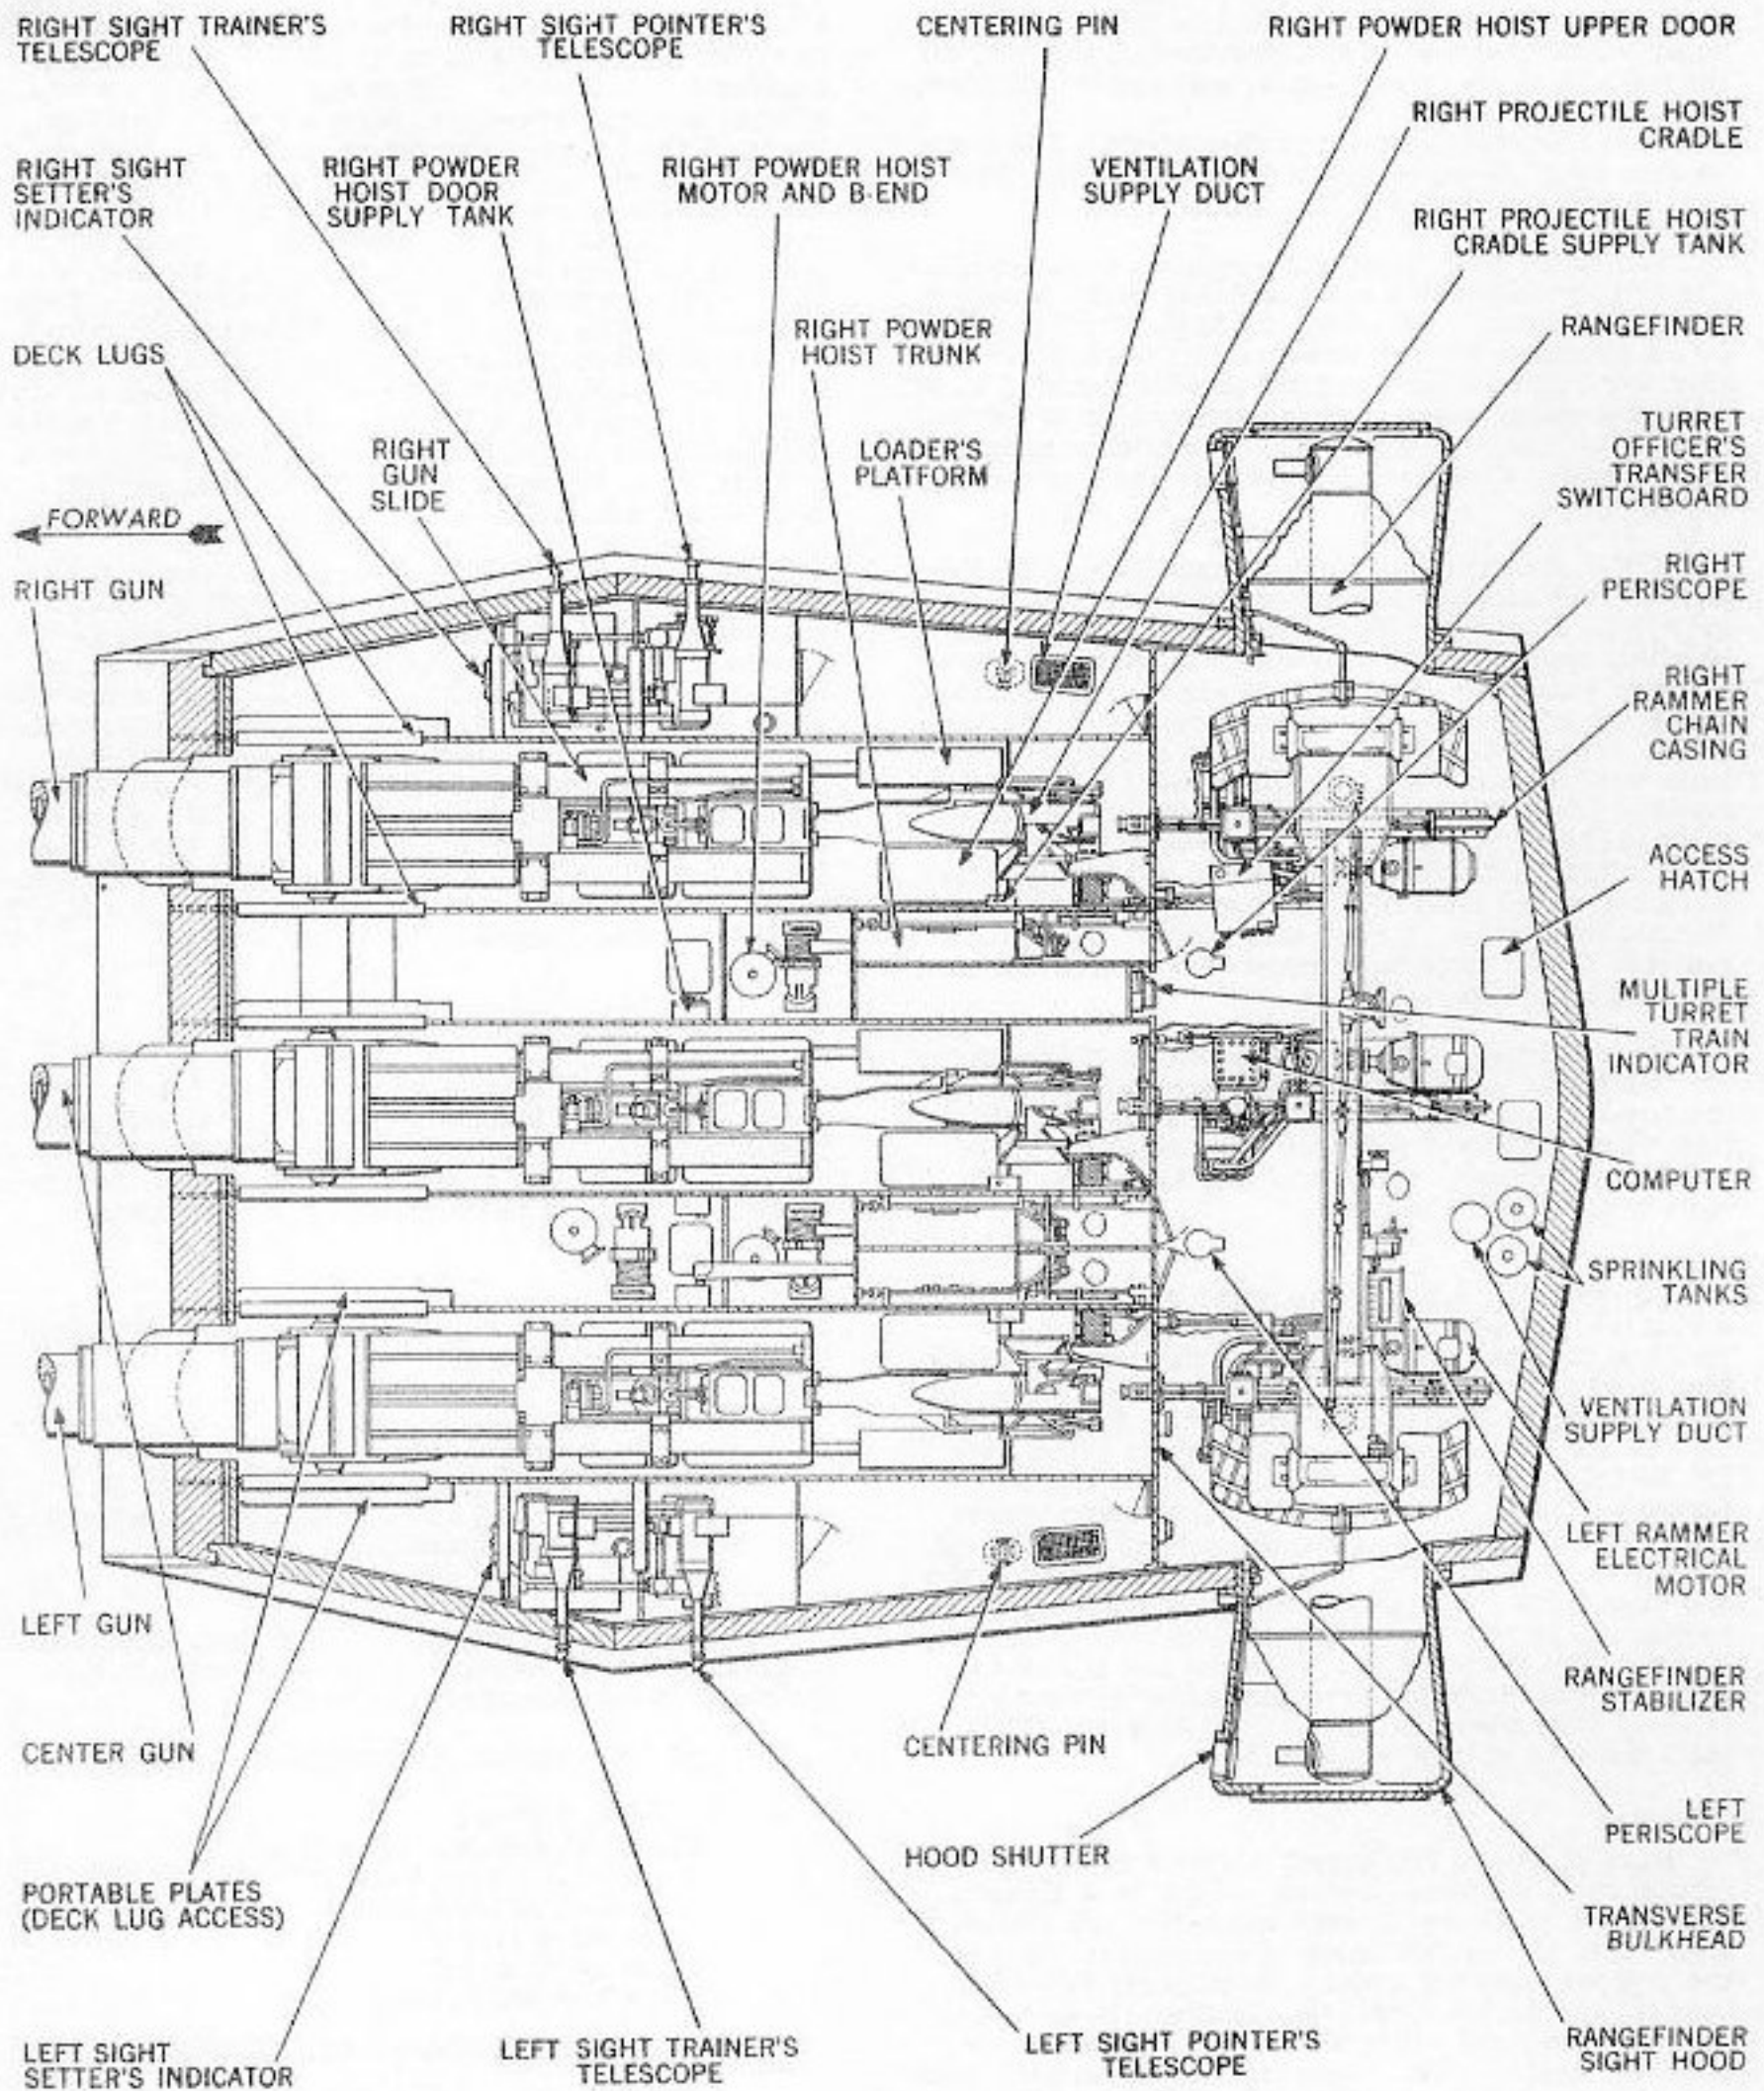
Ordnance Equipment in Gun House - General Arrangement - Plan View
